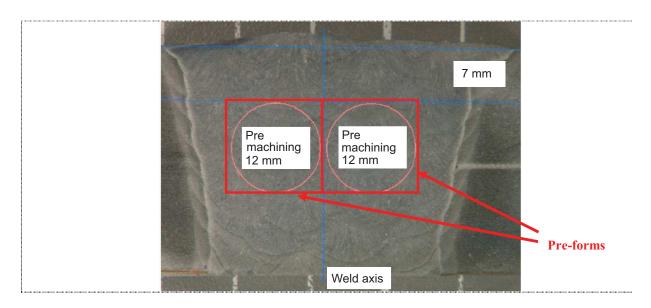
Position of Pre-forms Inside the Welded Zone (Macrographic View)
